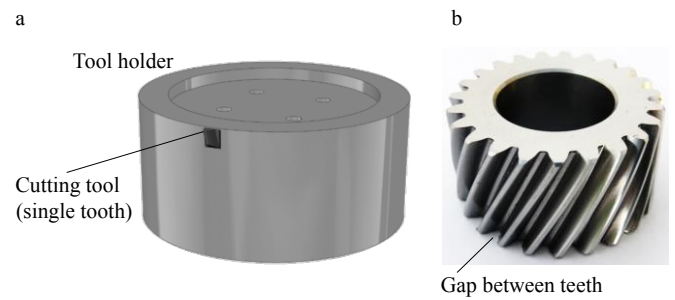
Experimental setup: a) single-toothed tool and b) gear geometry.
